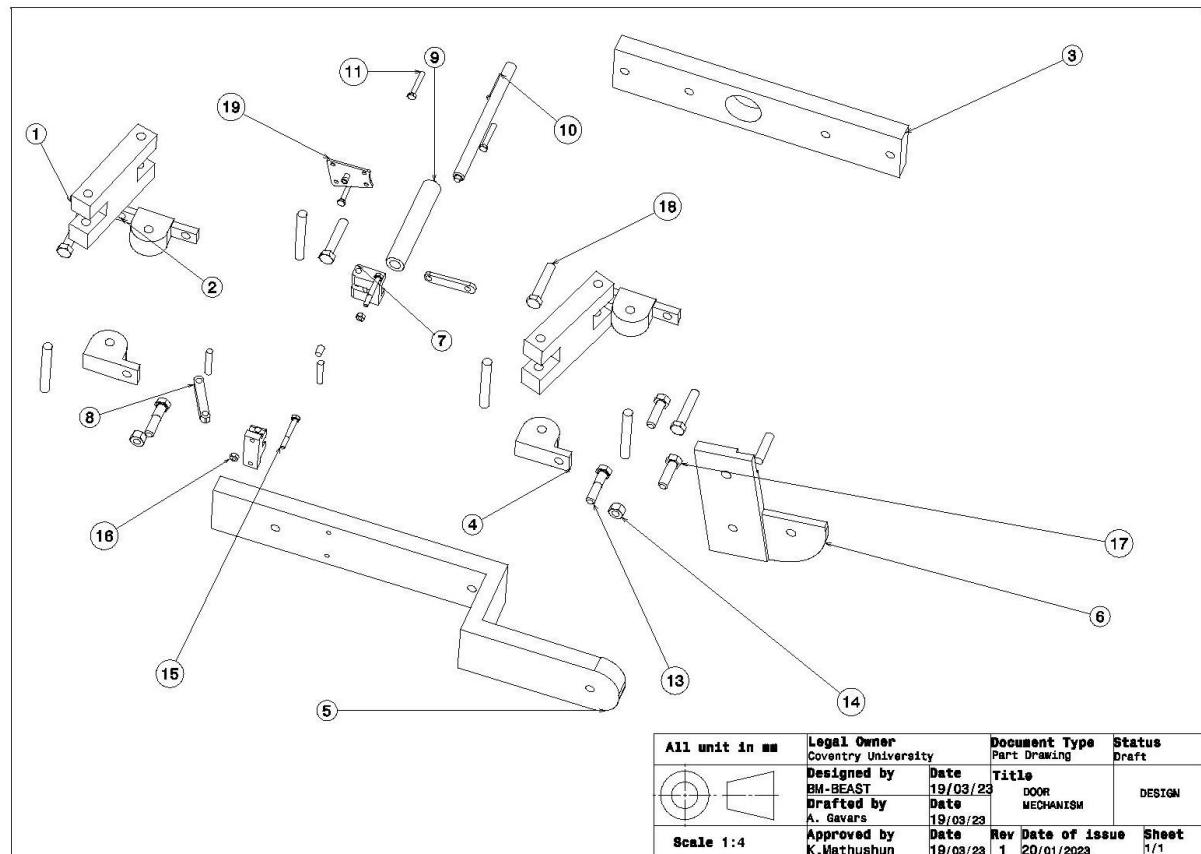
Figure showing the exploded view of hinge and small linear actuator.
